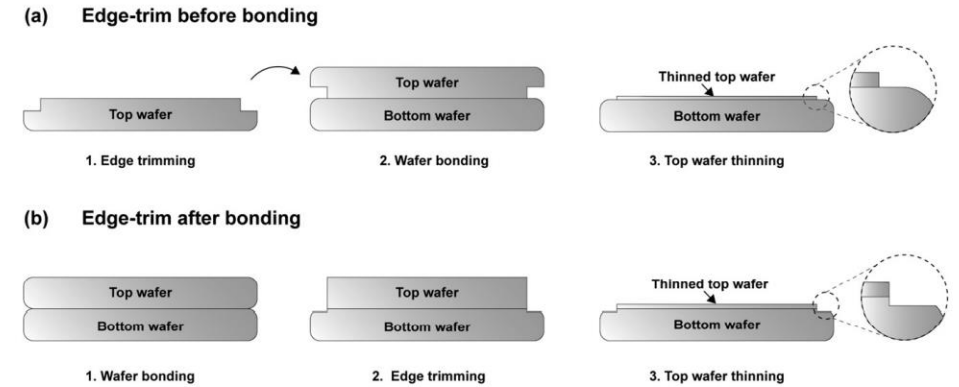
Schematic illustration of edge trimming process flow (a) Edge-trim before bonding (b) Edge-trim after bonding.
